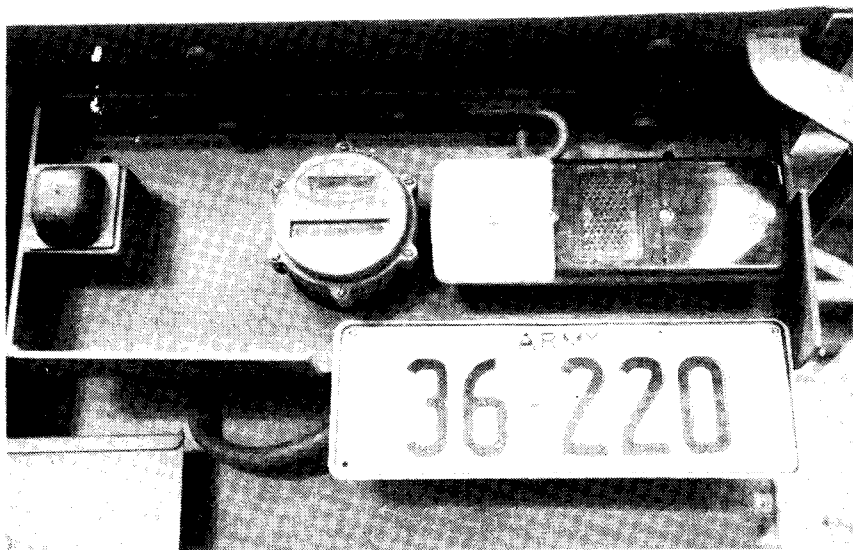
RELOCATED R/H TAIL-LIGHT ASSEMBLY
